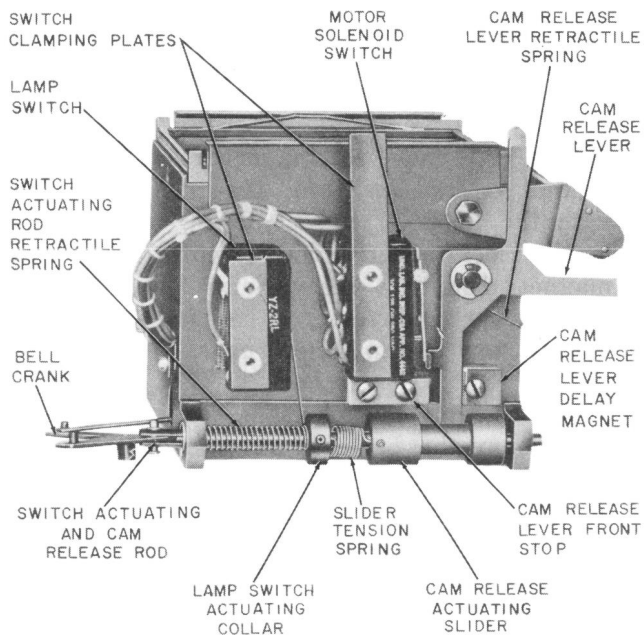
Lamp and Motor — Solenoid Switches (Image Chamber Removed from Camera)
